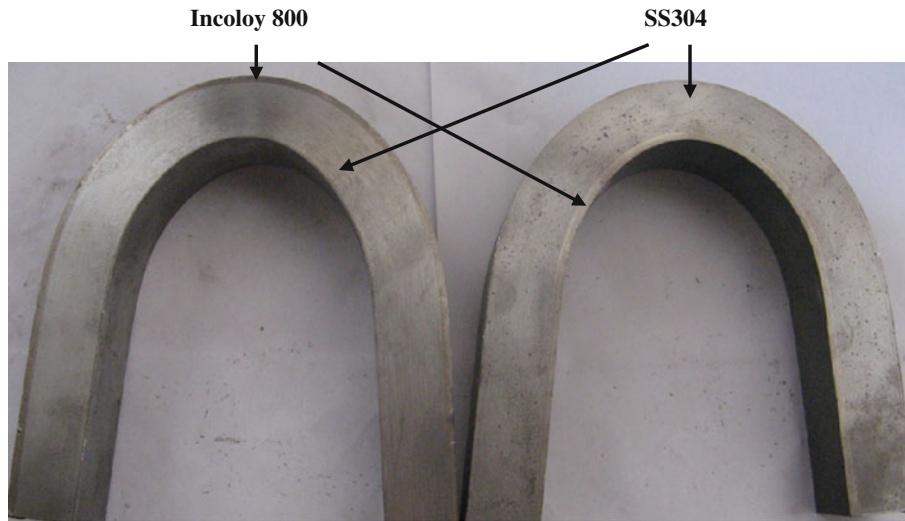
View of the samples after bending test. The figure shows no separation, tearing, or fracture is observed in the face and reversed-bend specimens within 180° after bending
